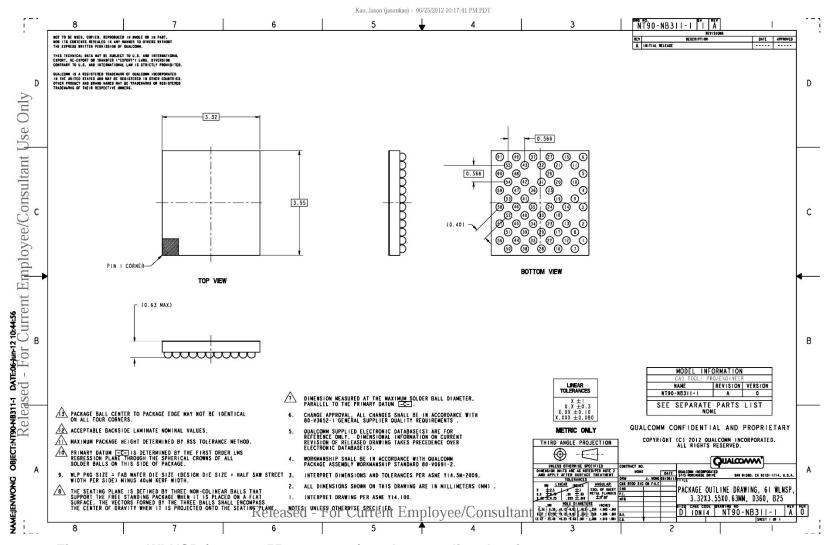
61WLNSP (3.32 \times 3.55 \times 0.63 mm) package outline drawing
